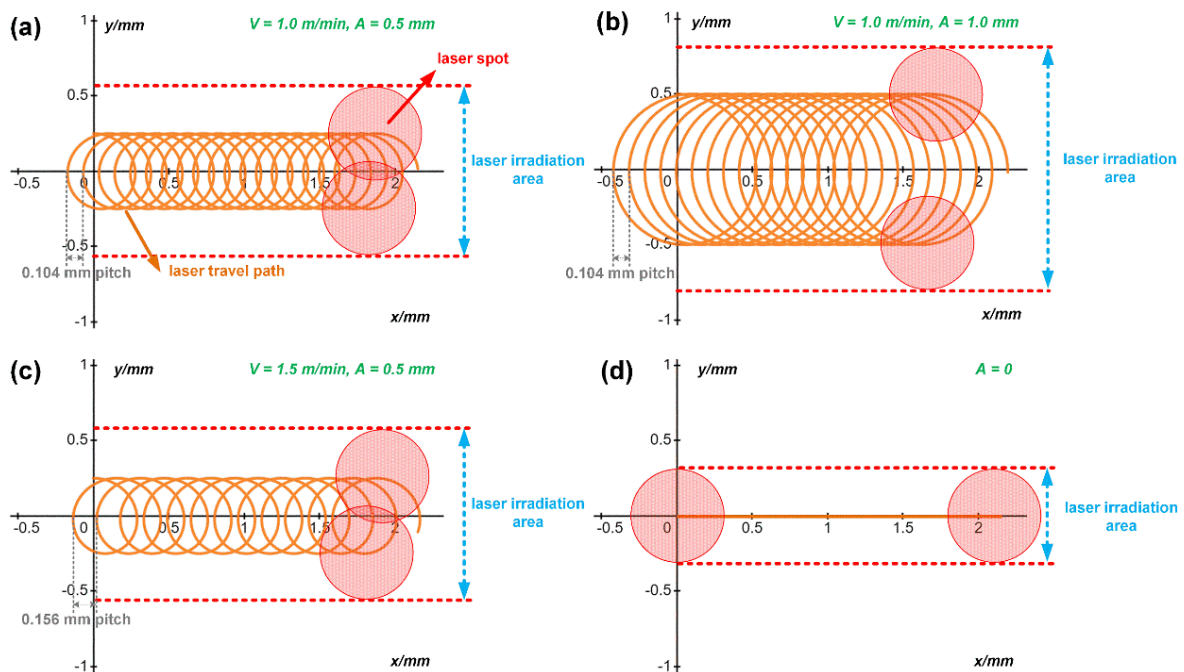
Laser travel path and radiation area with varying parameters: (a)  $v = 1.0 \text{ m/min}$ ,  $A = 0.5 \text{ mm}$ ; (b)  $v = 1.0 \text{ m/min}$ ,  $A = 1.0 \text{ mm}$ ; (c)  $v = 1.5 \text{ m/min}$ ,  $A = 0.5 \text{ mm}$ ; (d) static-spot laser welding.
